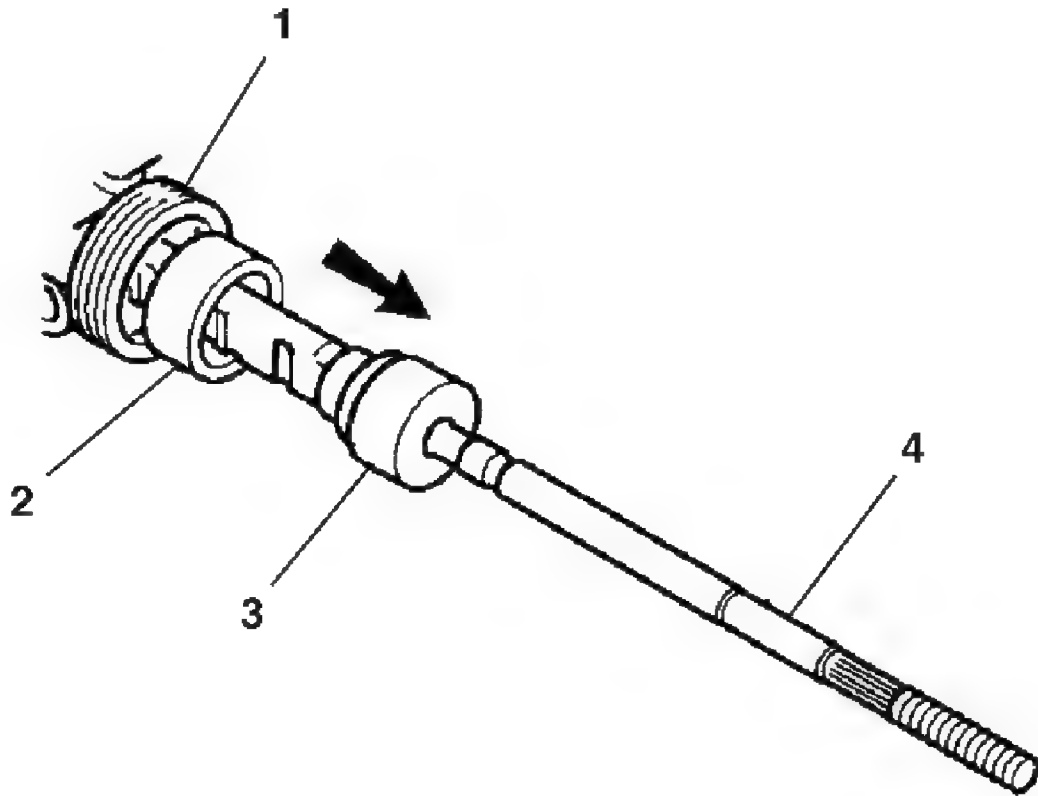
Identifying Shock Dampener & Inner Tie Rod Housing
